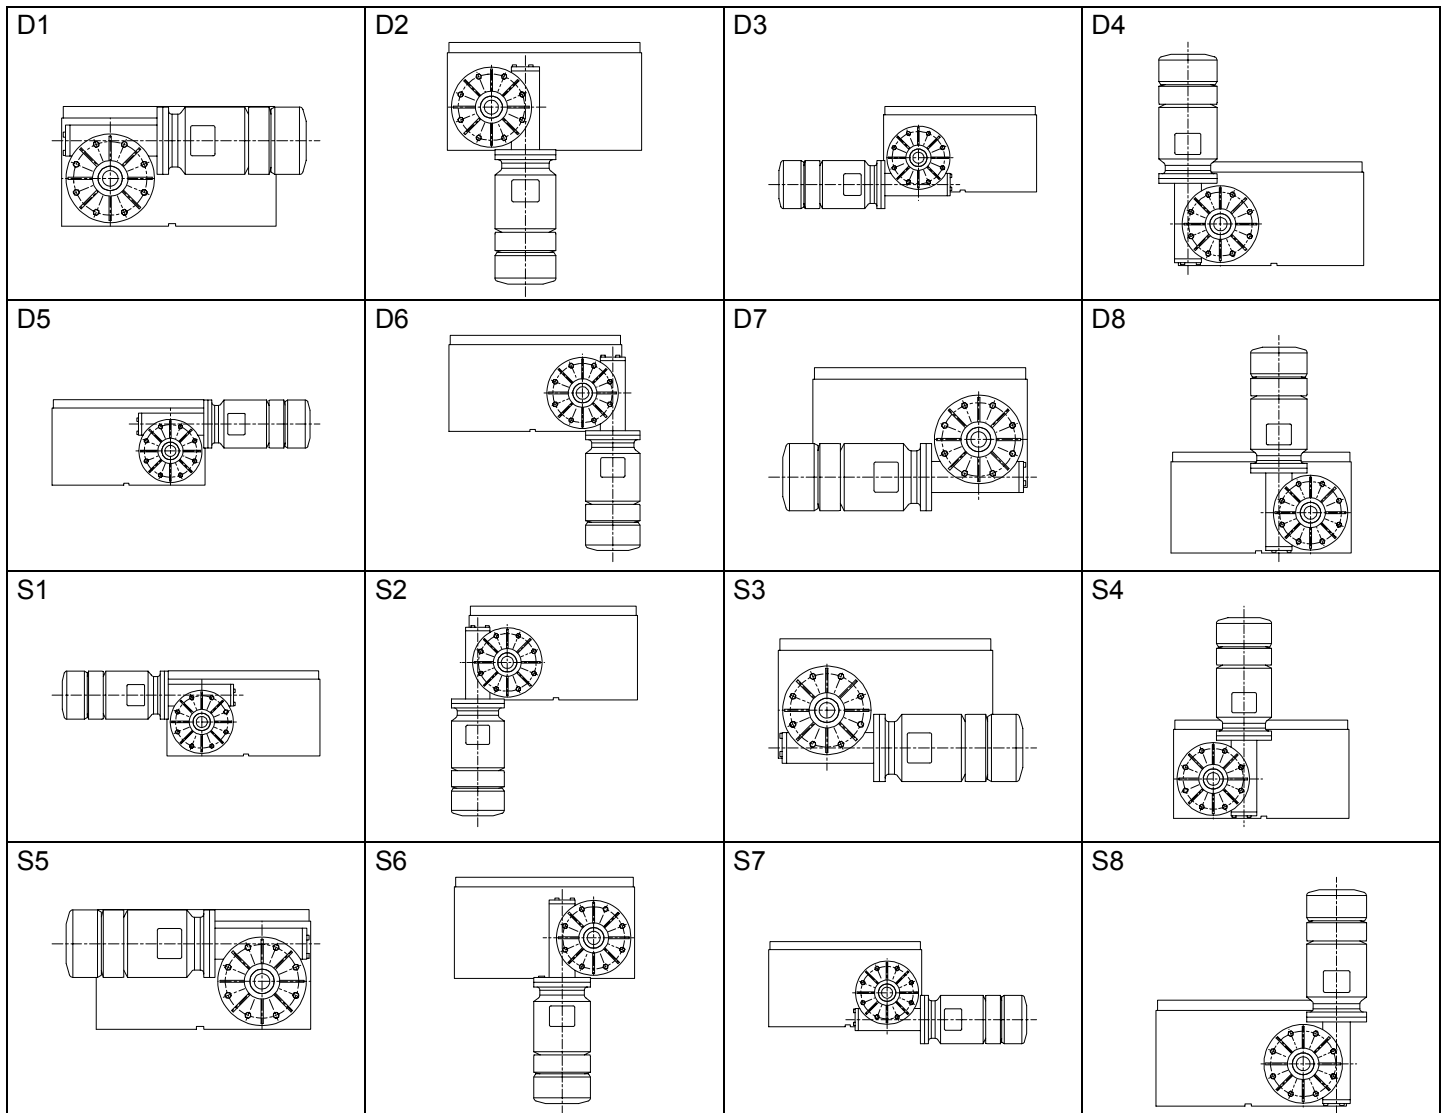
Starting from VR versions, if on the order the position of the reduction gear or gear motor is not indicated, the table will be given with the gear motor in D1 position. For packing and delivery reasons the reduction gears are put in D1, D7, or S3, S5 position. It will be care of the installer to position them in the correct position required.
